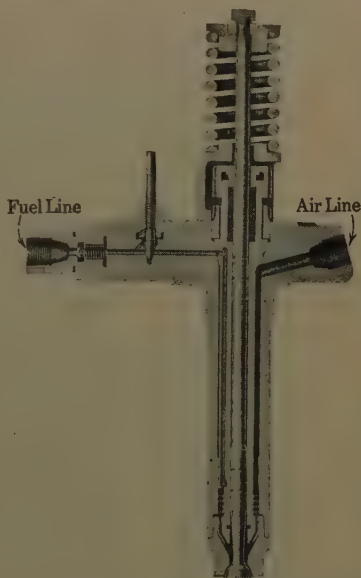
17 X 24 AIR-INJECTION DIESEL ENGINE
